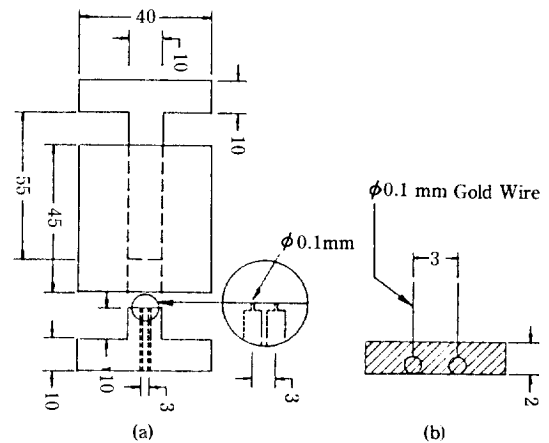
The schematic diagram of (a) mounting mould and (b) gas sensor element.
